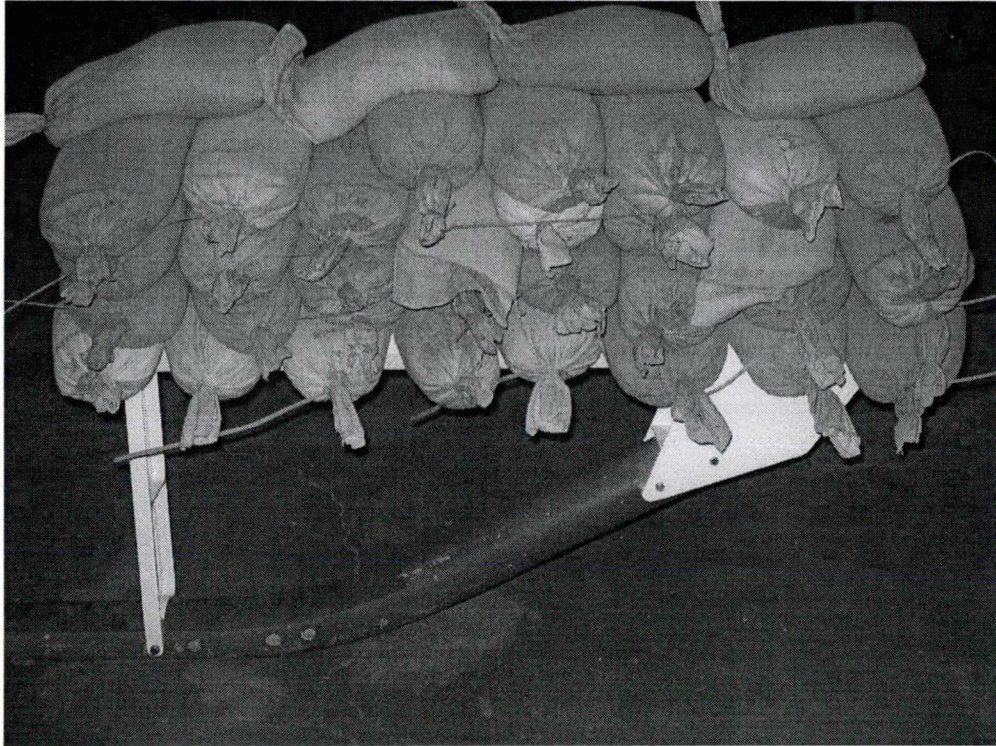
Ultimate Maneuvering Load on Short Step Assembly
